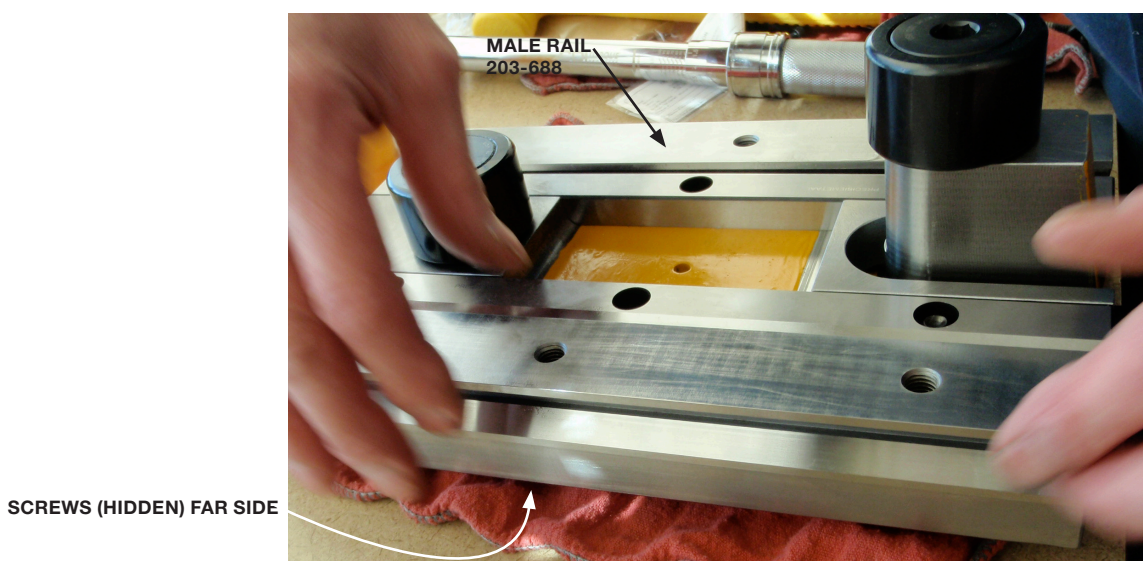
Bearing Cage with rollers are installed between male rail and 203-688 to complete the bottom finish assembly
